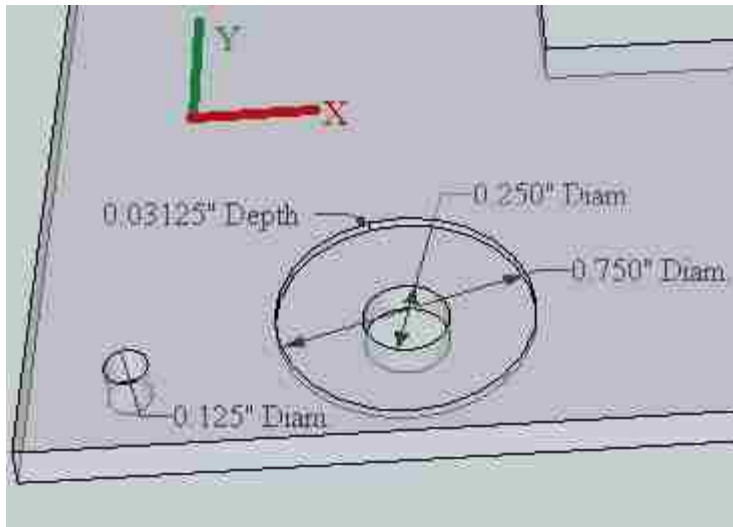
Orthogonal view of the 10x10 cm² lower trimmer aluminum plate illustrating hole dimensions.
